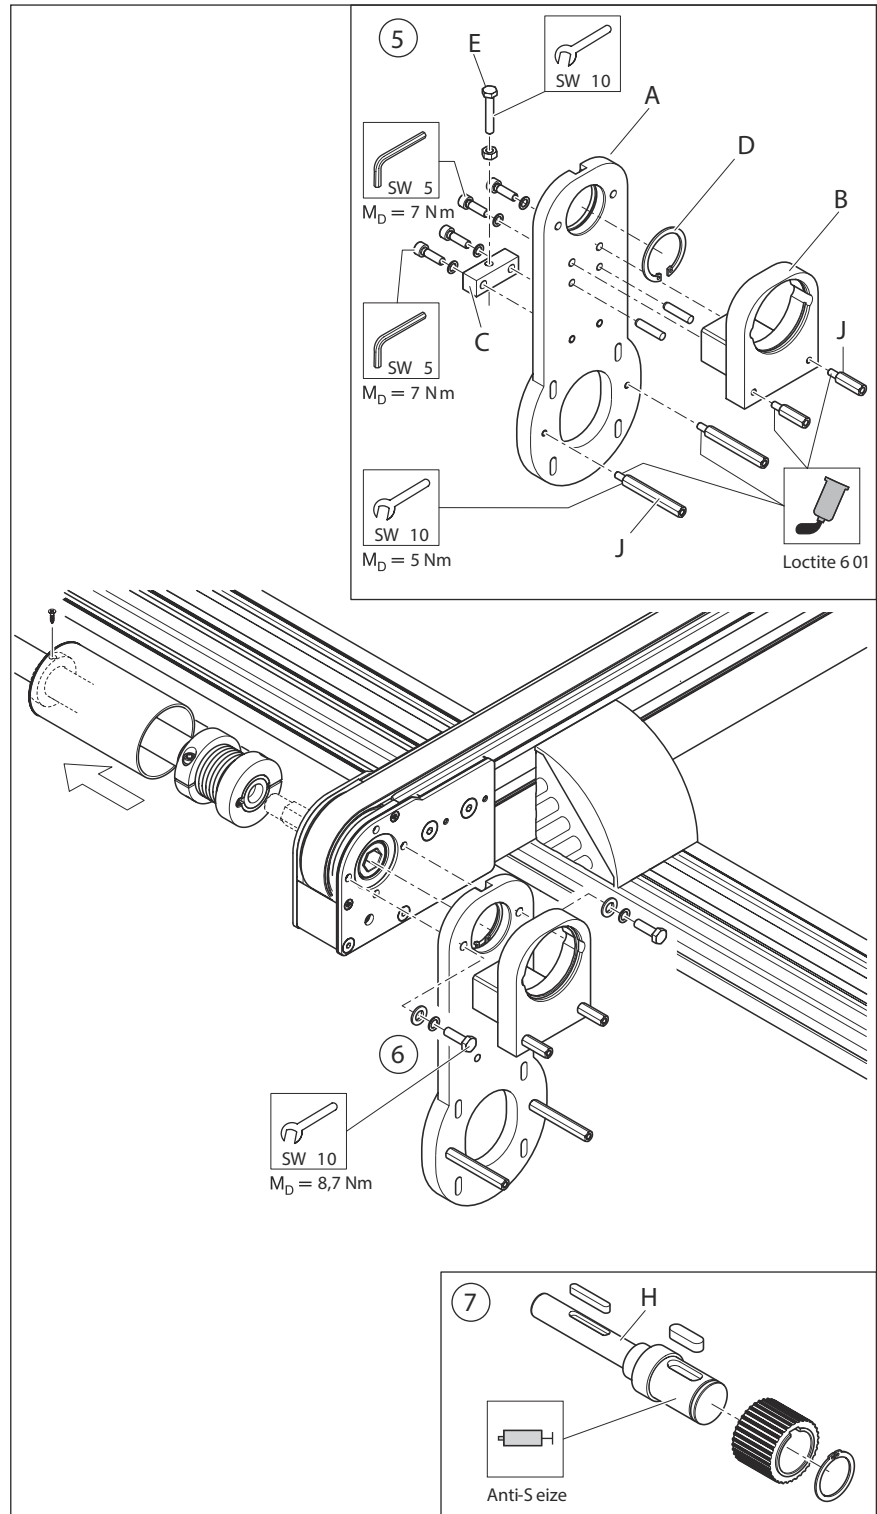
Assembly at belt section CSS/N, CSS/NT: MS = 3 (2/3)
